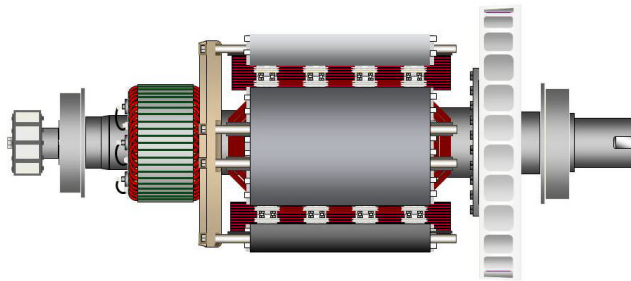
TWO BEARING ALTERNATOR ROTOR SHOWING SHAFT WITH KEYWAY FOR FLEXIBLE COUPLING (AT RIGHT)
